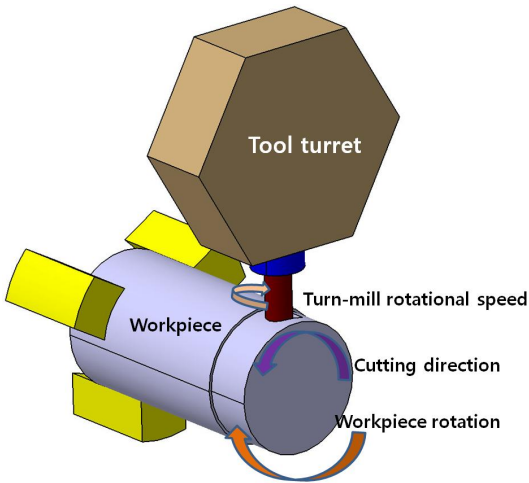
Cutting process of workpiece by CNC lathe C-axis and turn-mill rotational speed
